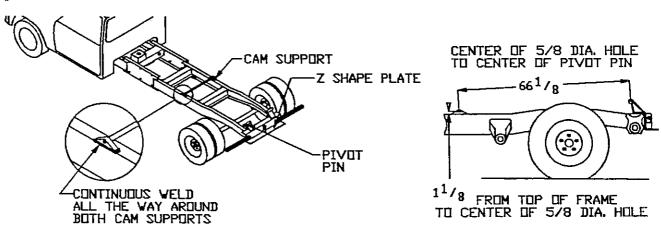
CAM ROLLER SUPPORT INSTALLATION
